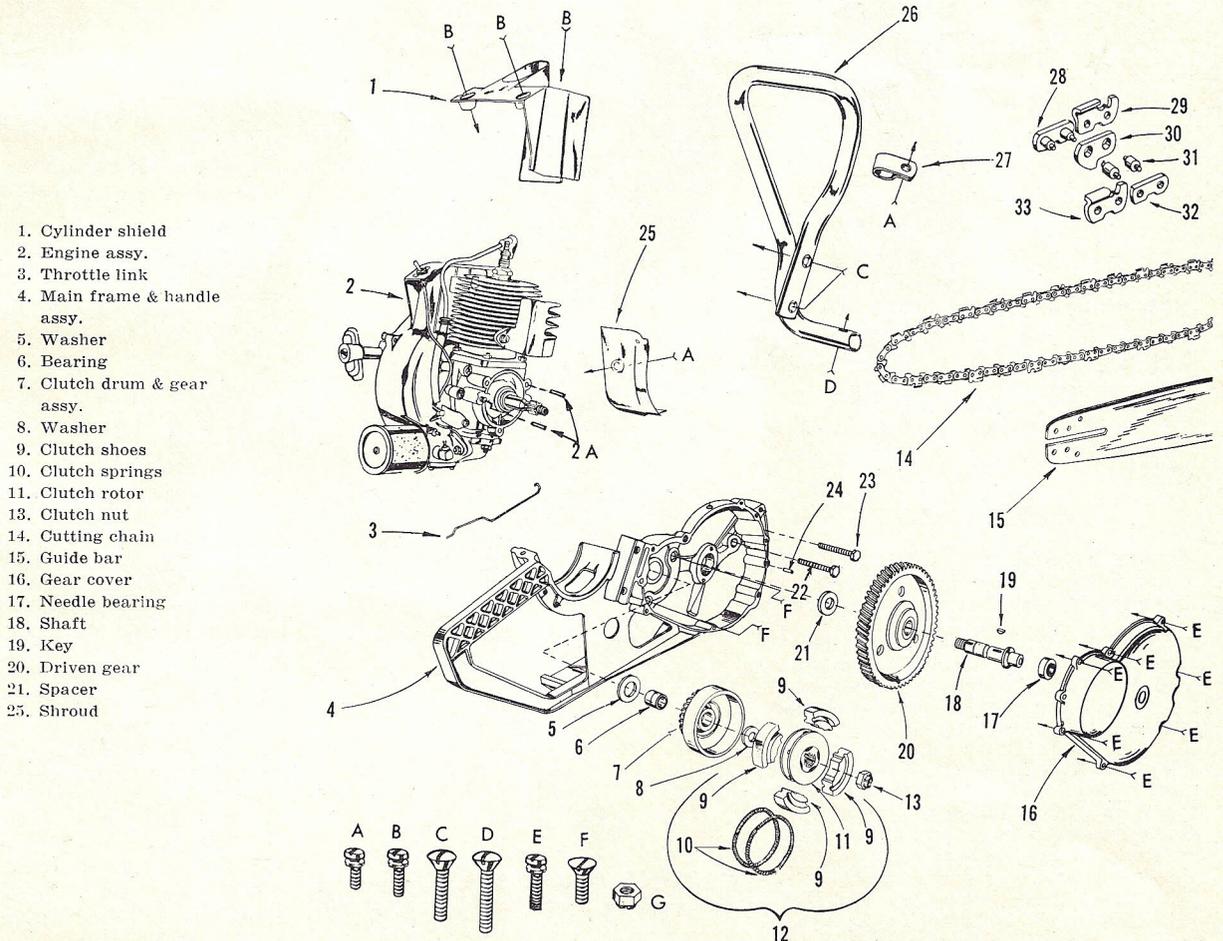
Exploded view of gear drive transmission. Refer to Fig. S8 for fuel tank assembly and chain drive sprocket.
